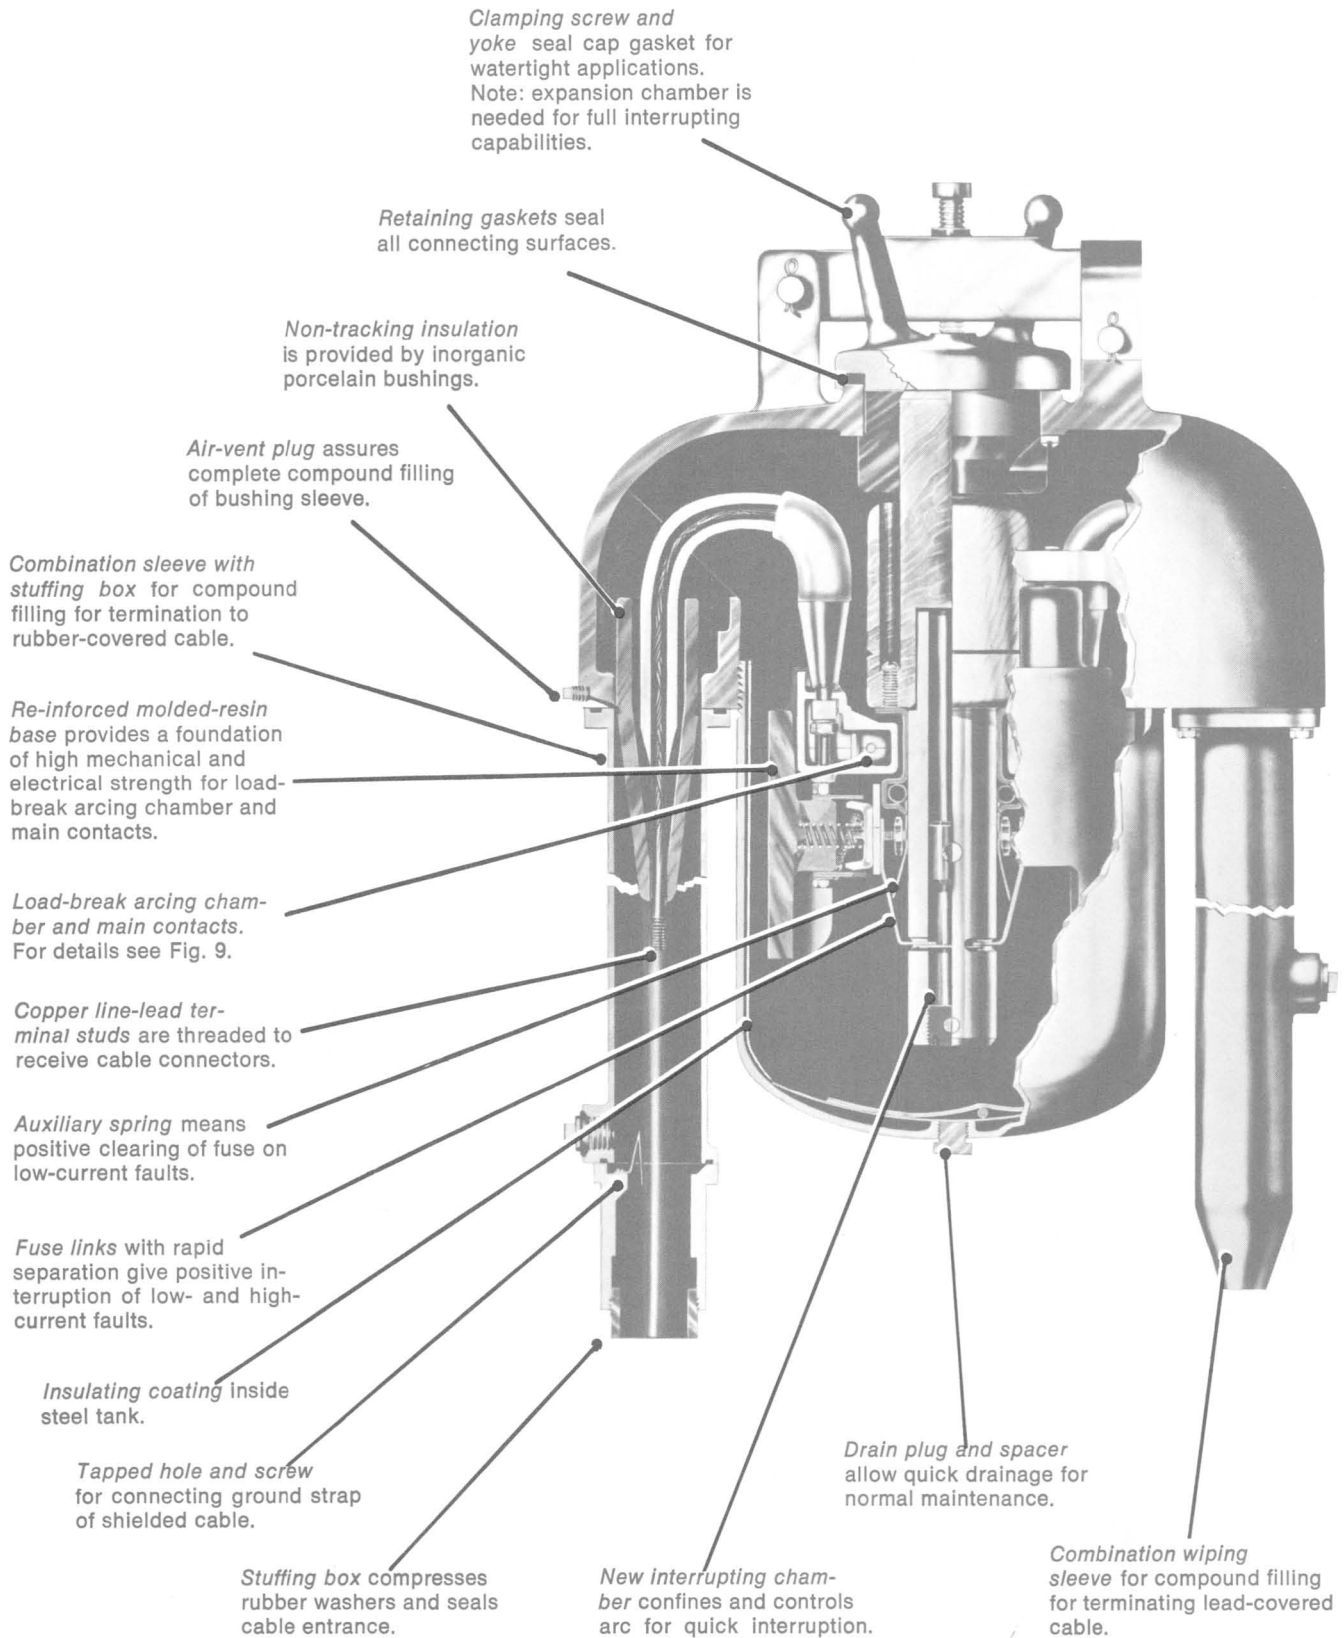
Sectional drawing of sealed oil cutout — 15 kv, 200 amp.
